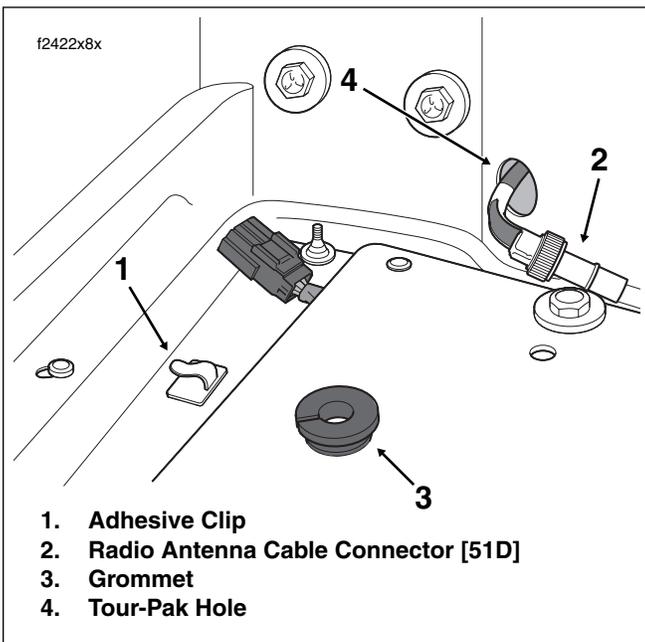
Feed Main Harness Thru Tour-Pak Hole
